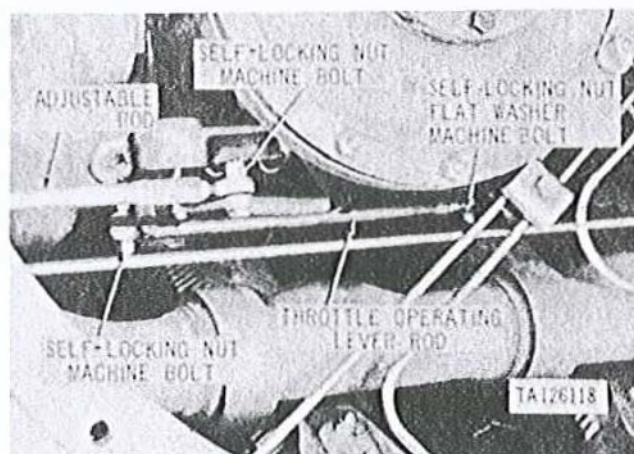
Removing or installing adjustable rod and throttle operating lever rod.
